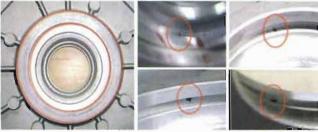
Machining of bore in variant #1200 results in shrinkage pores of Level 4 exposed to surface in-between the circled area indicated in almost all the parts after machining.
